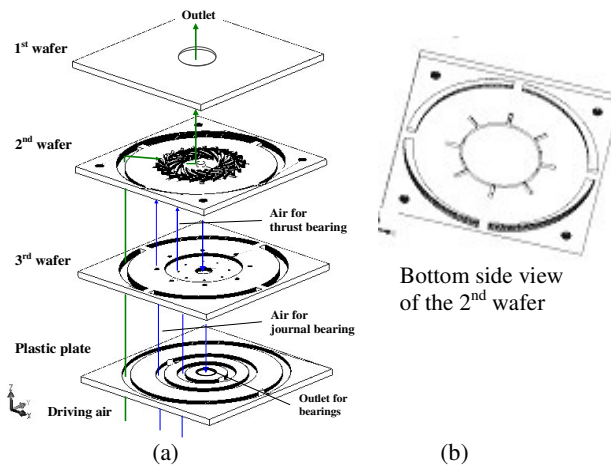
The exploded view showing the air paths. The bottom-side view of the 2<sup>nd</sup> wafer shows the slots for static journal bearing
